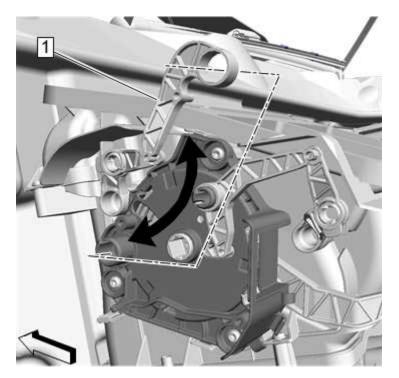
Defroster Control Lever Courtesy of GENERAL MOTORS COMPANY
